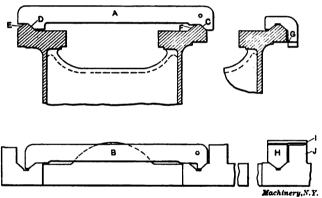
Gages for Testing the Planing of Lathe Bed and Carriage
